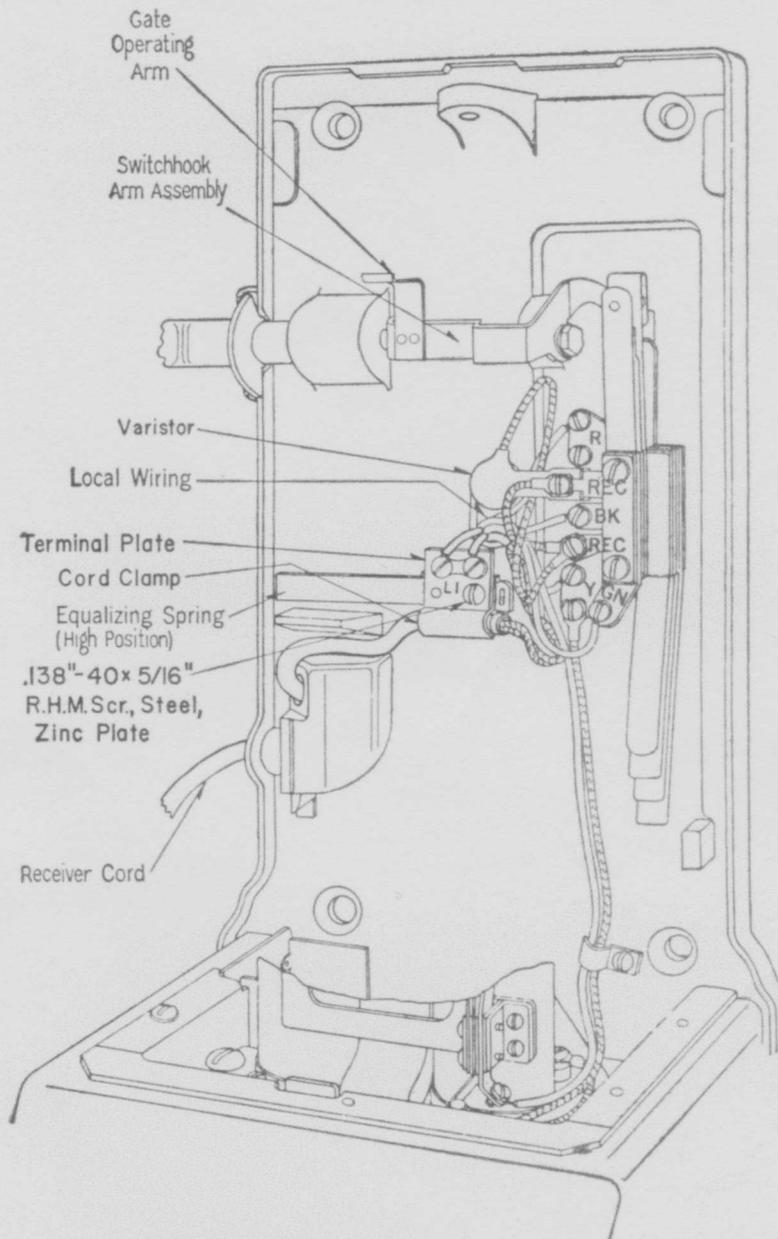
166-type Coin Collector—Lower Housing and Backplate Assembly
